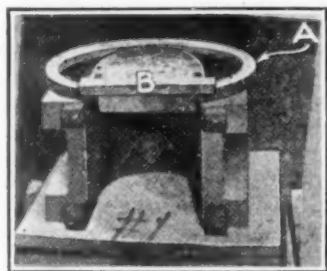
DRIVING BOX BUSHING READY FOR BABBIT
